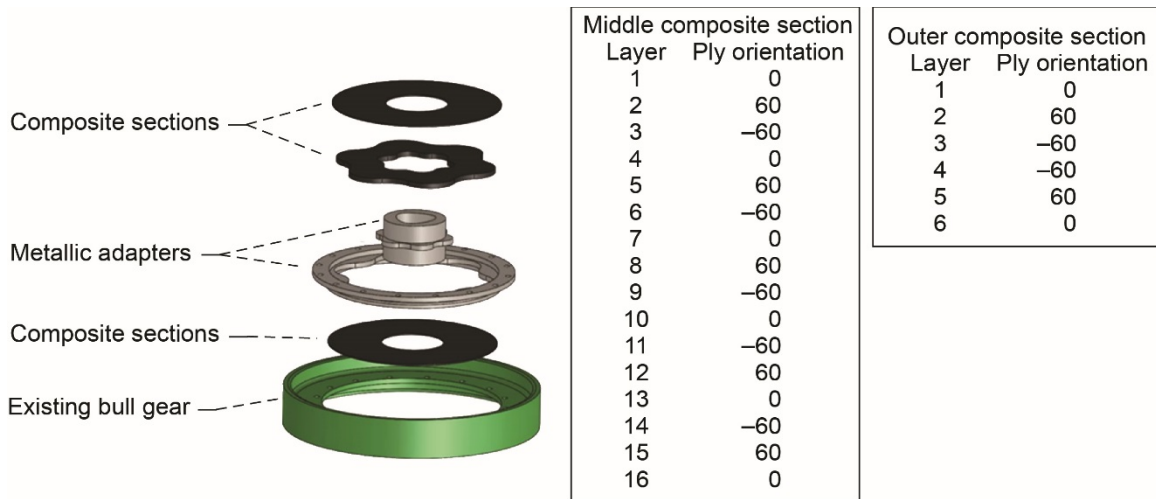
Exploded view of the hybrid bull gear with composite sequence definitions.
